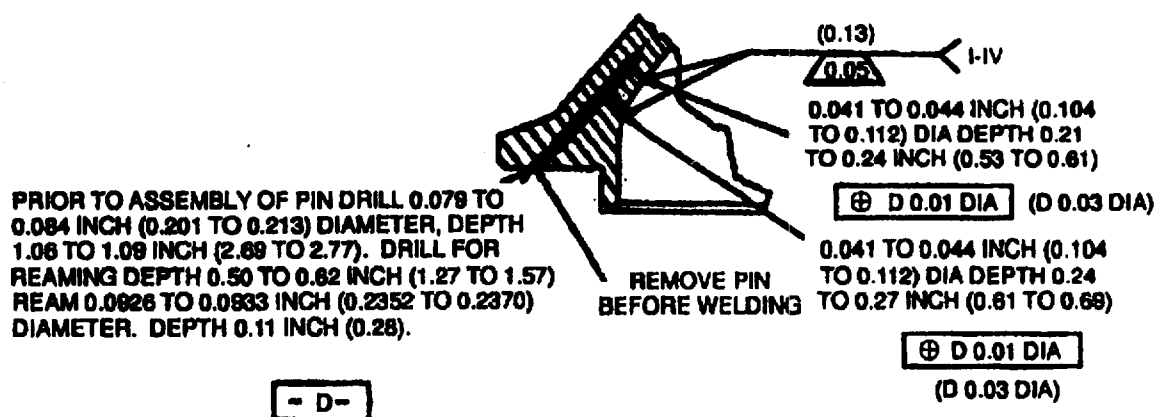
Power Shaft Bearing Retainer Assembly Dimensional Inspection Locations.
